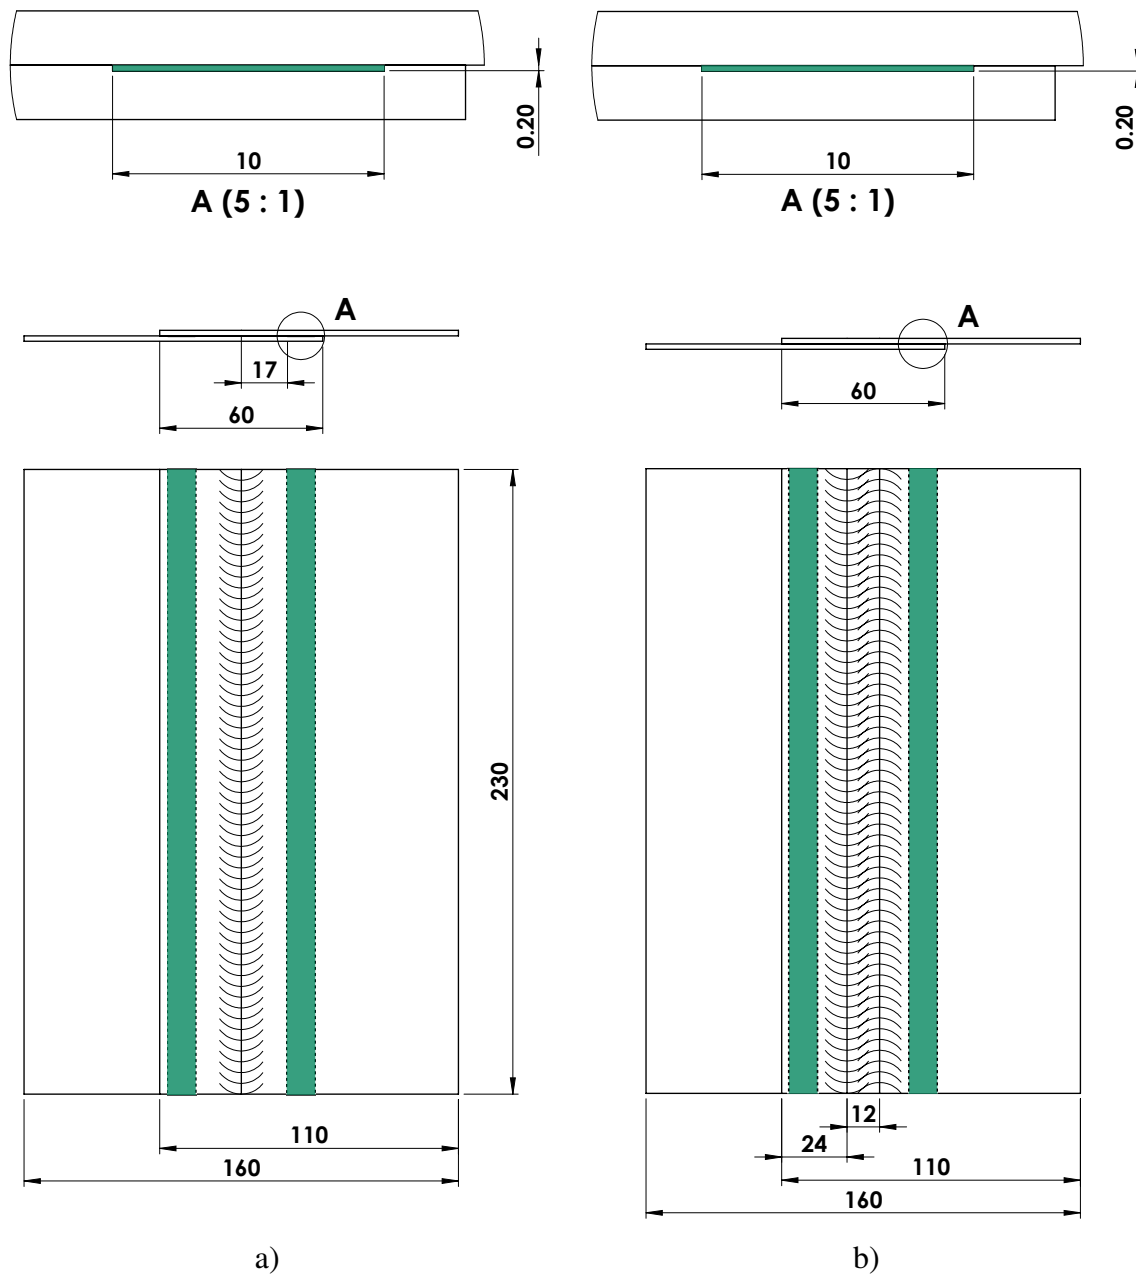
Single lap joint scheme with channel for adhesive with a) single weld pass and b) double weld pass.
